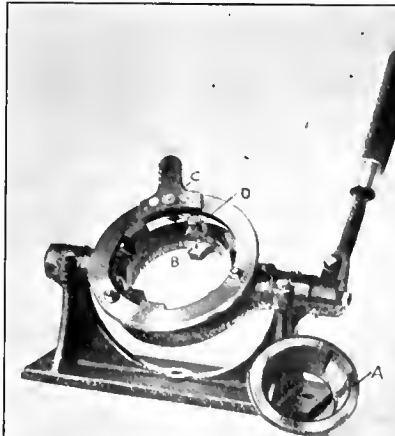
Fixture of which the Casting shown in Fig. 1 forms a Part
